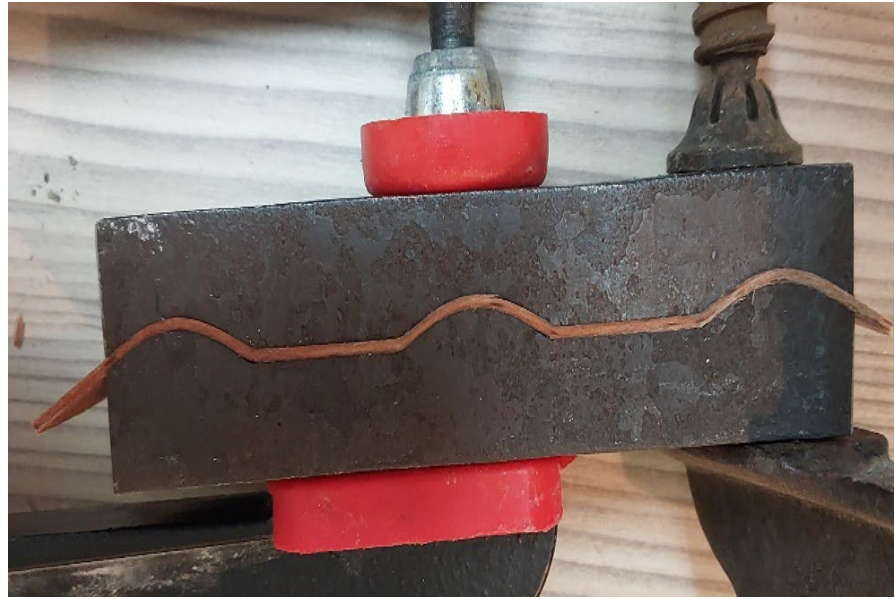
Pressing and drying of multi-beads in bending moulds.
